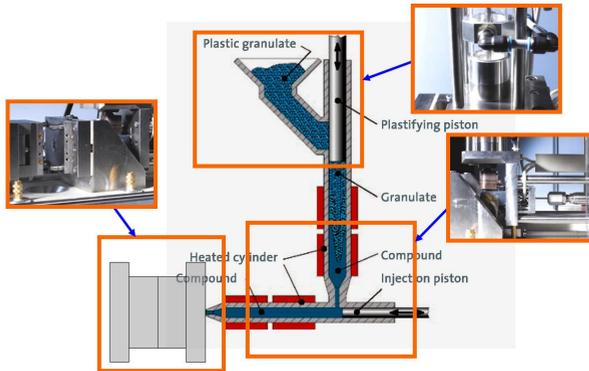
μ IM machine structure: two-piston (plasticizing and injection) unit, miniaturized hopper, micro mould, metering and injection chambers [1].
